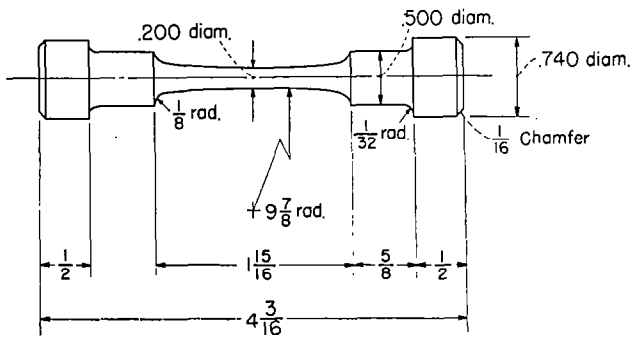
Fatigue test specimen tested by ALCOA. All dimensions are in inches.
